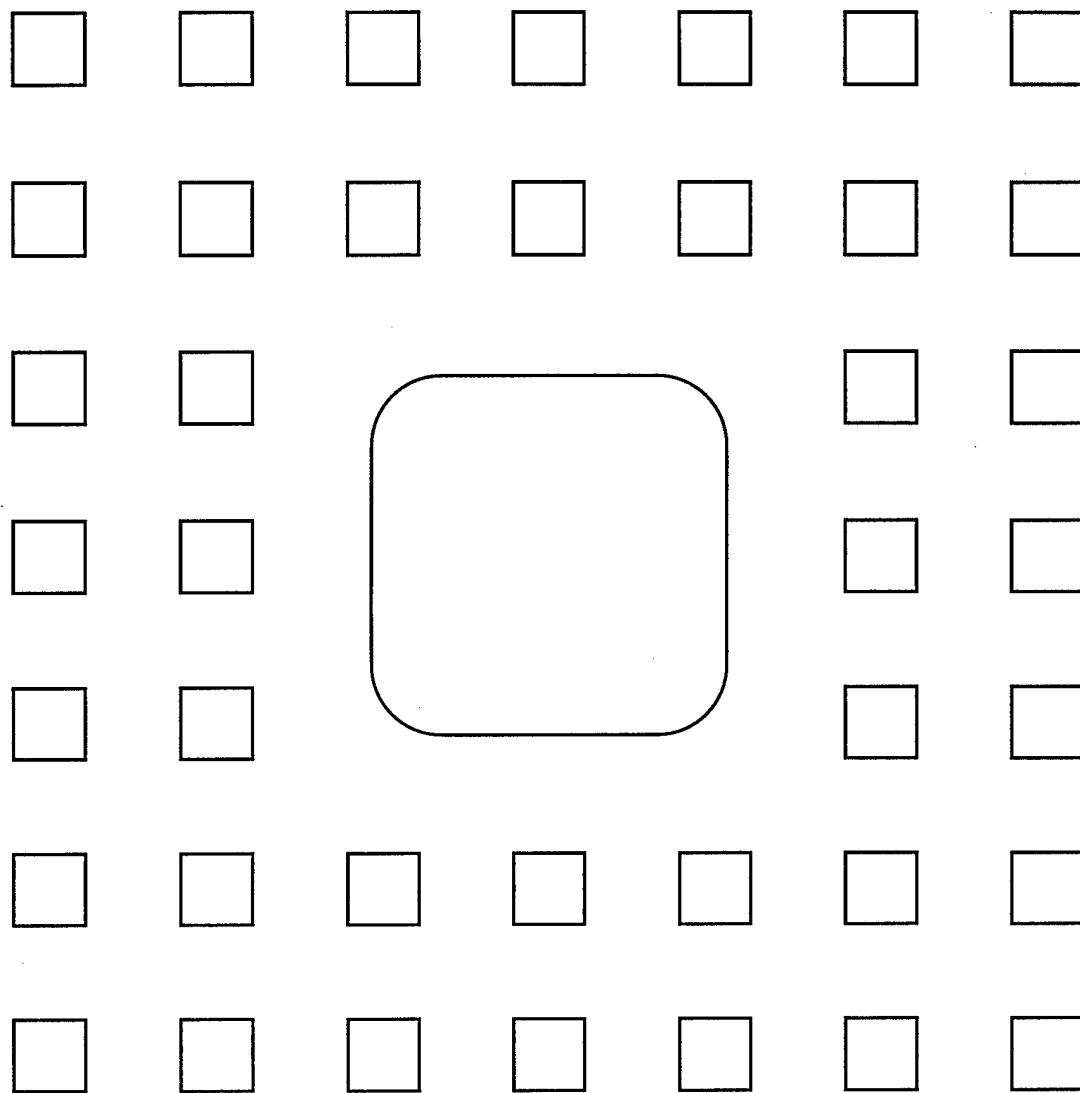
Solder pad array and die cavity for LTCC-M BGA
